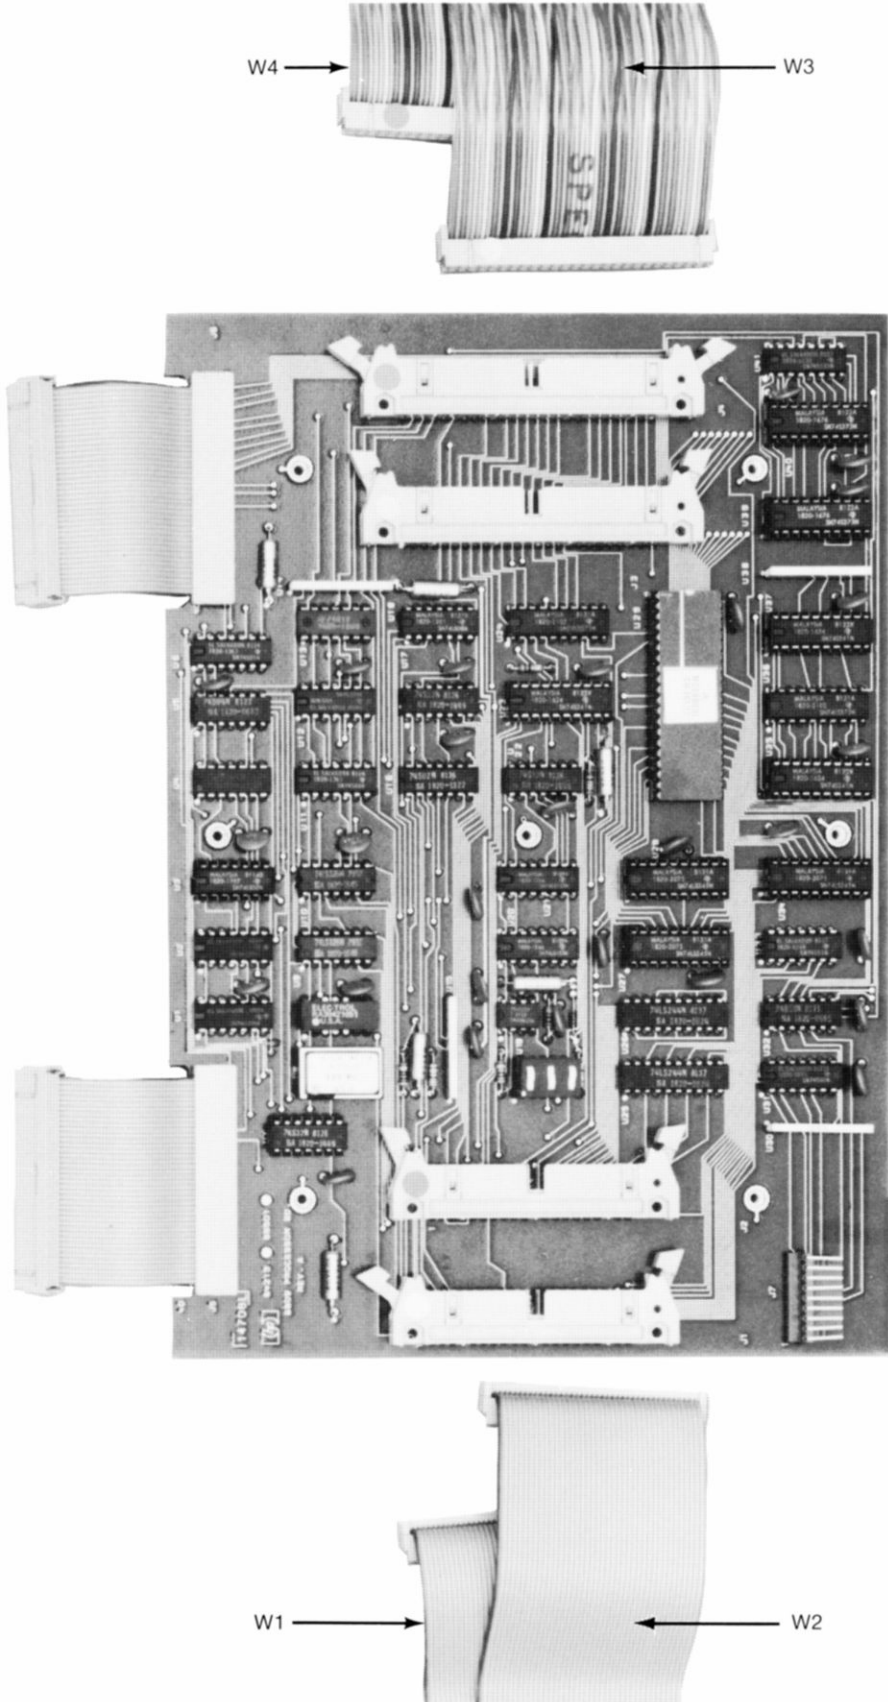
6809 Emulator Pod Synchronizer Board
